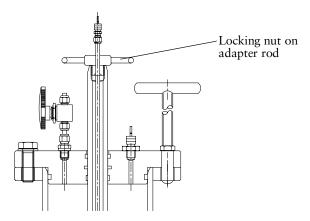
Longitudinal section through a column base end plate and adapter rod.
